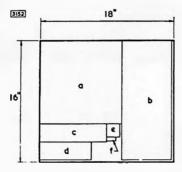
ALUMINIUM SHEET FOR CHASSIS
